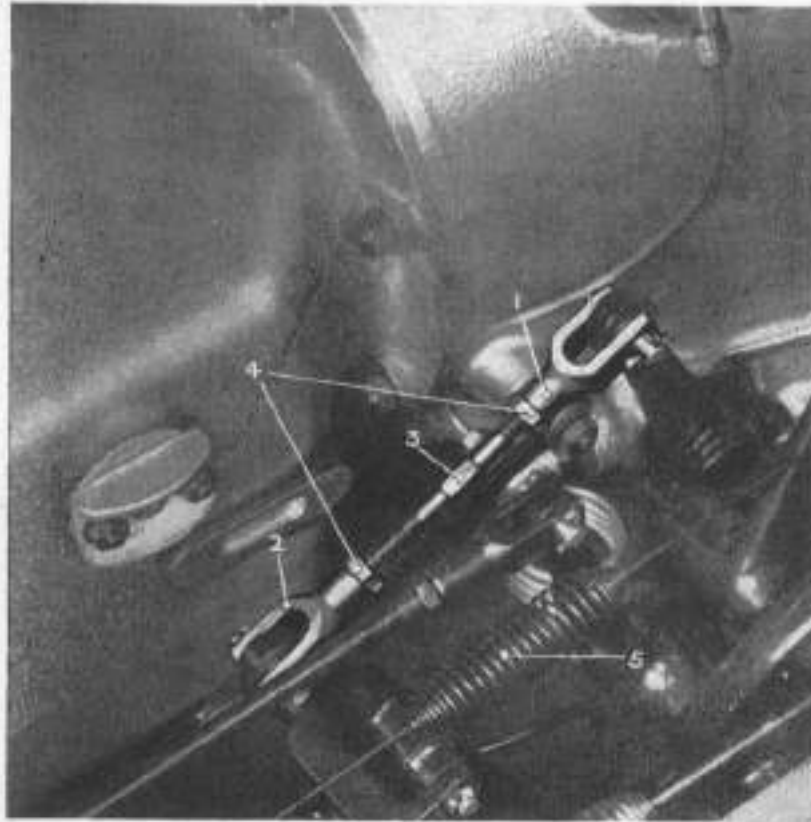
ADJUSTMENT CLUTCH PEDAL.
